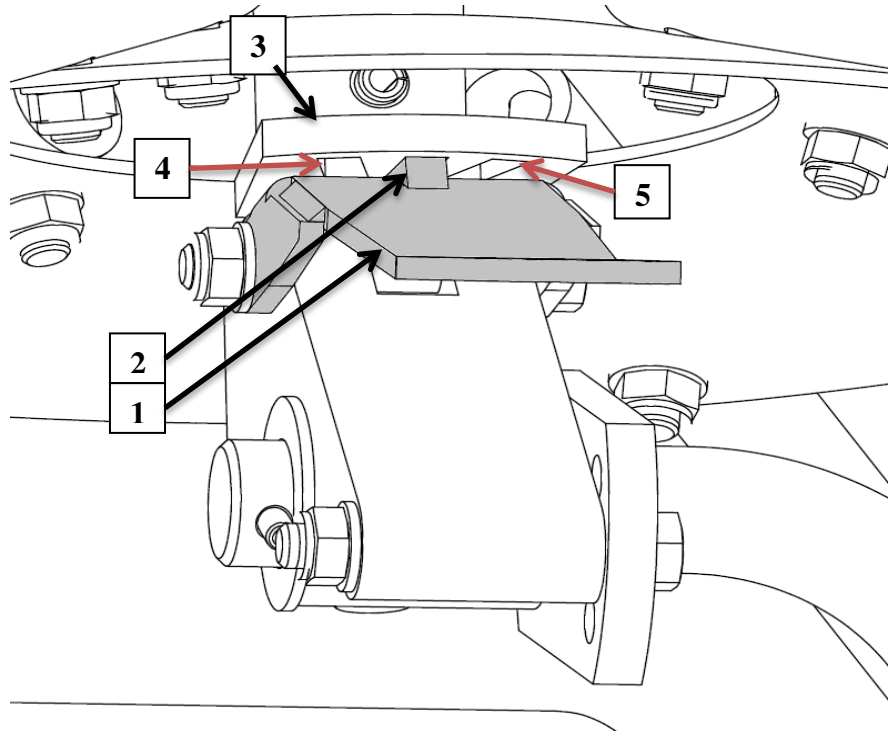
Tedder wheel handle: 1 - wheel rotation handle, 2 - wheel rotation handle block, 3 - locking sleeve sheet, 4 - left fastening hole, 5 right fastening hole.
